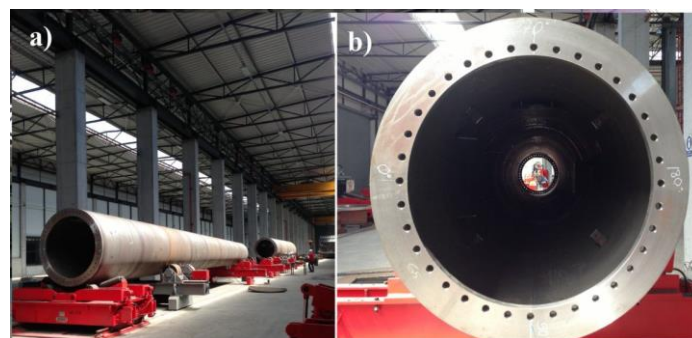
a) Steel cylindrical tower b) Flange connection (Kanbur 2014)
